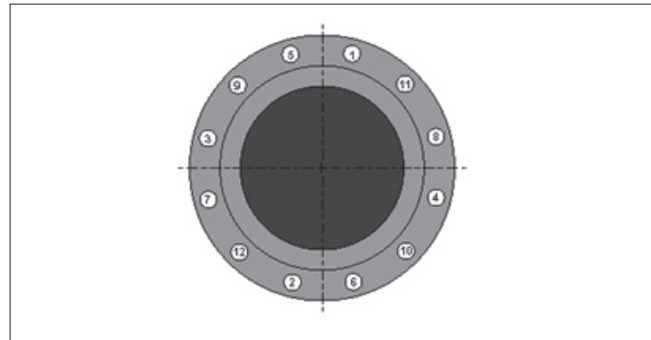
Sample for a crosswise installation with twelve flange holes.
